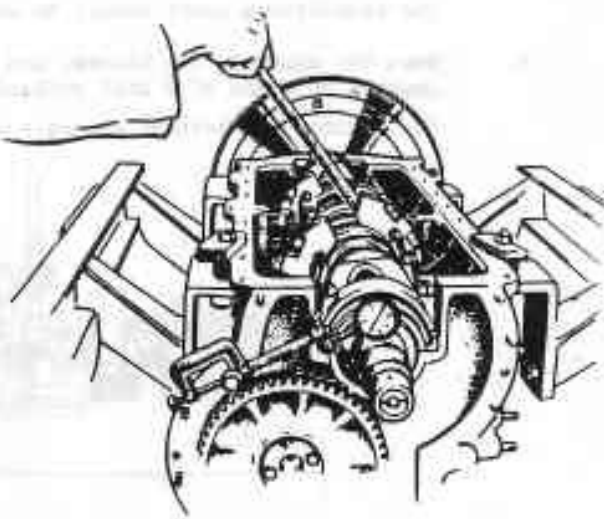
CHECKING CRANKSHAFT END FLOAT.
